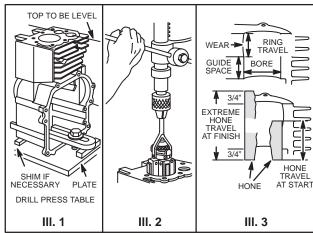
HONING CYLINDER (SEE PAGE 3 FOR ENLARGED DRAWING.)
